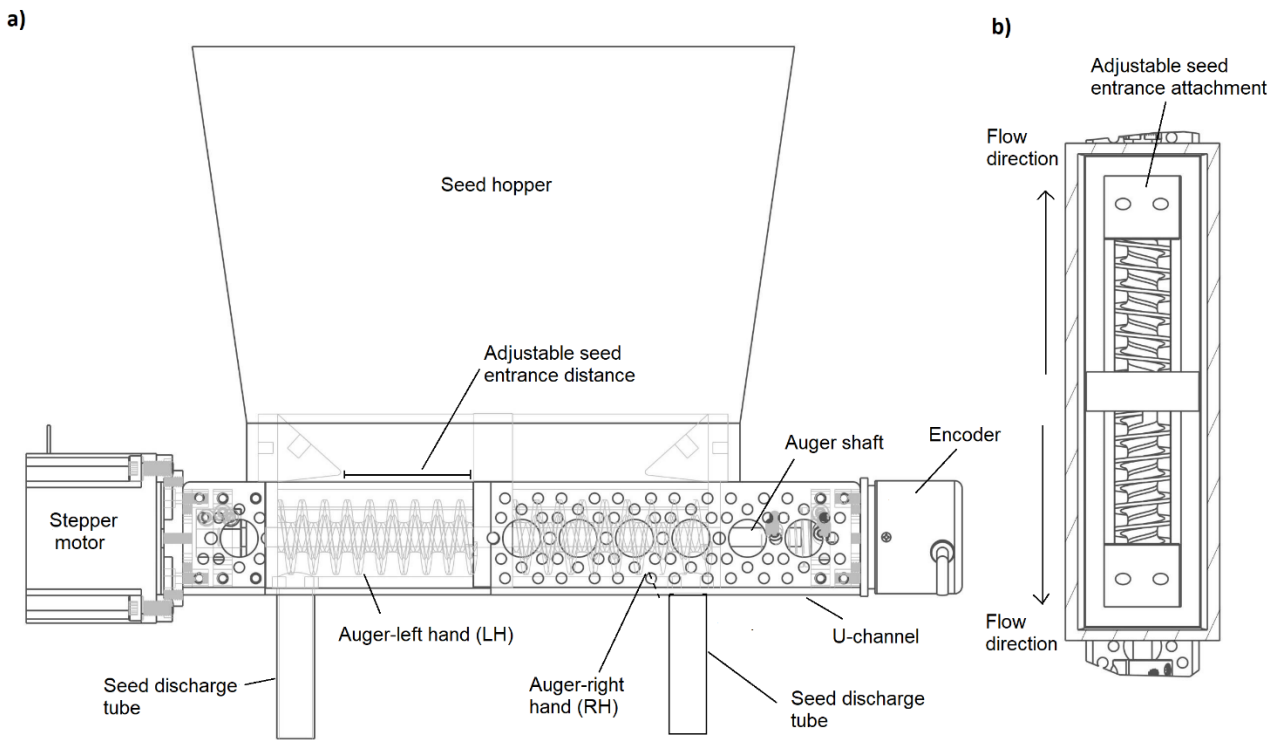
a) Schematic diagram of the feed mechanism showing the main components b) Top cross-sectional view of the auger housing.
